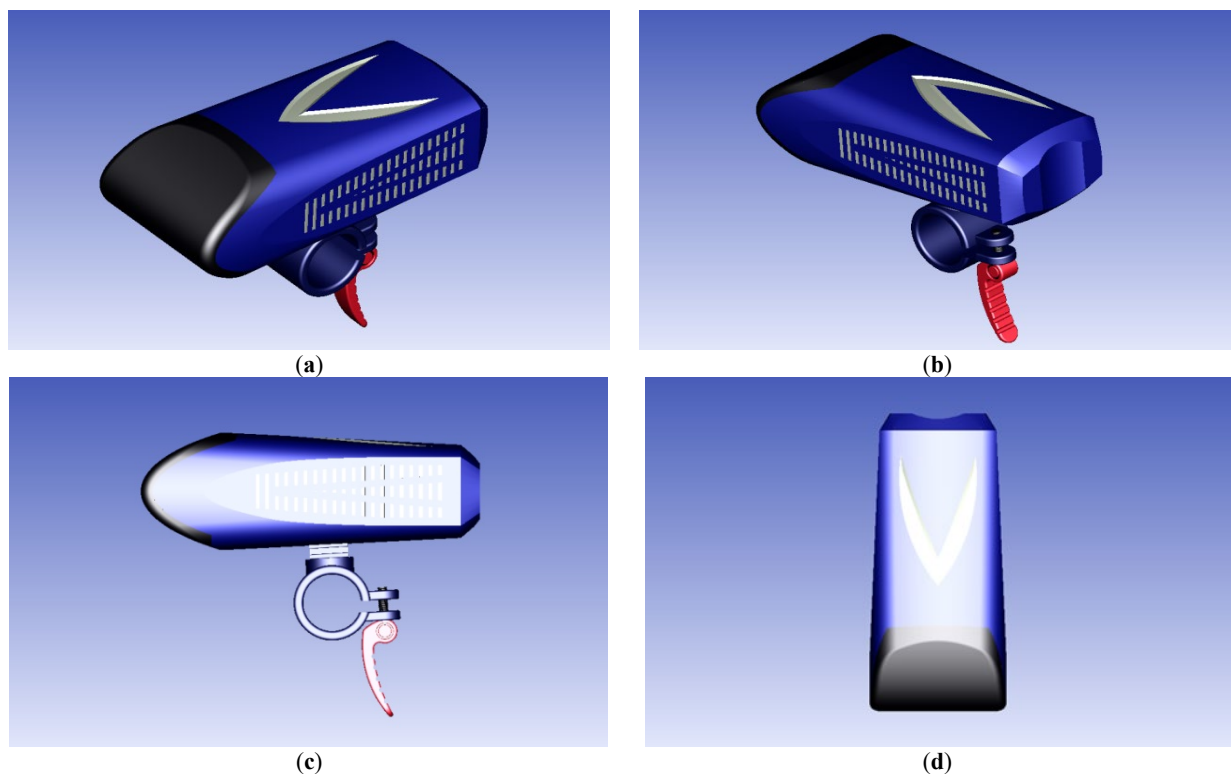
(a) Oblique front view, (b) oblique rear view, (c) side view, and (d) top view. Rectangular lamps with heat dissipation holes on side.
